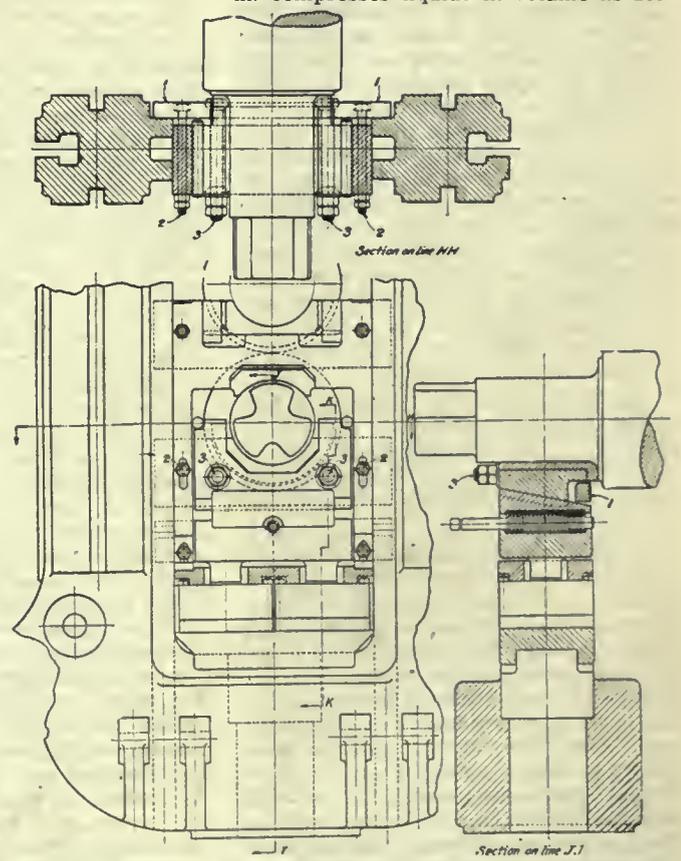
DETAILS OF MILL SHOWING BOLT WITH BALL JOINT TO PROVIDE FLEXIBLE CONNECTION BETWEEN THRUST PLATE AND LOWER ROLL CARRIER.
